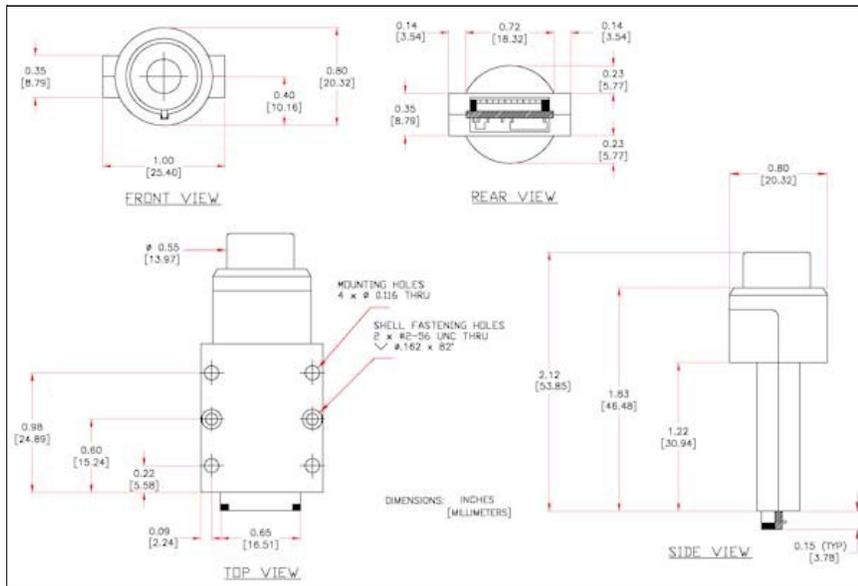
AXR/PA-210 with housing mechanical dimensions.
